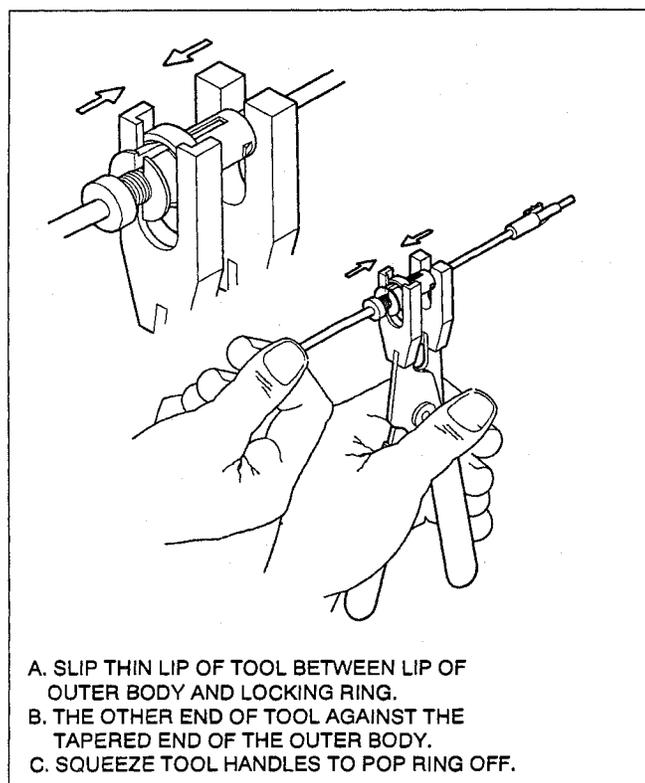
Unlocking Adjuster Ring on Park Lock Cable
